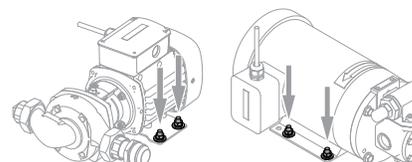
Coolant pump assembly and oil pump assembly showing .38 inch (10 mm) × 4 diameter mounting holes.
